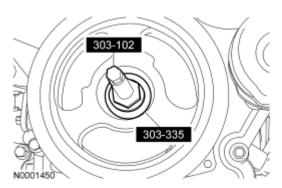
Installing Crankshaft Pulley Courtesy of FORD MOTOR CO.
